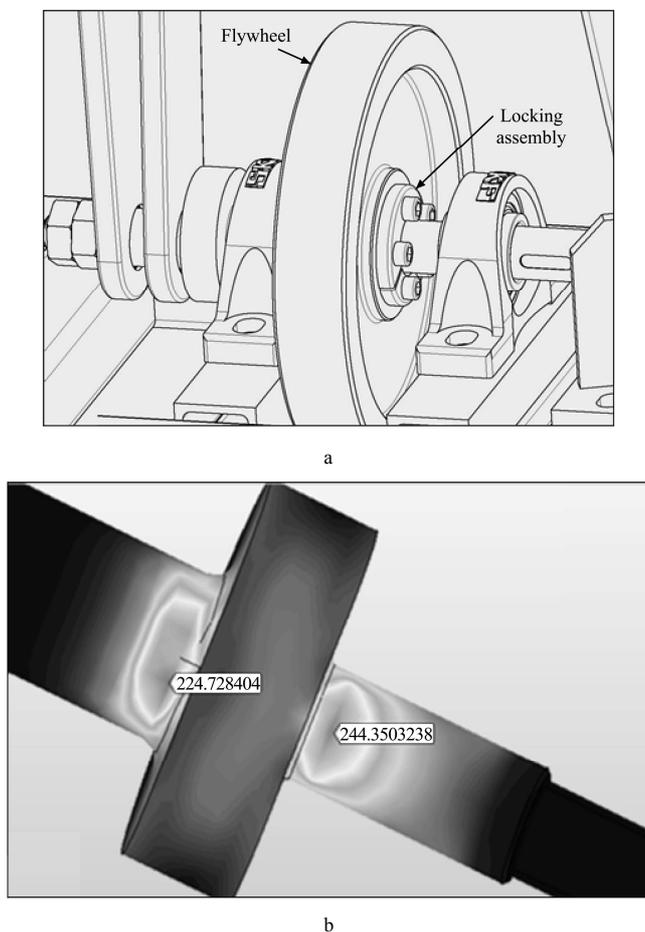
View of the driving assembly (a) and stresses (MPa) in the transmission shaft (b)
